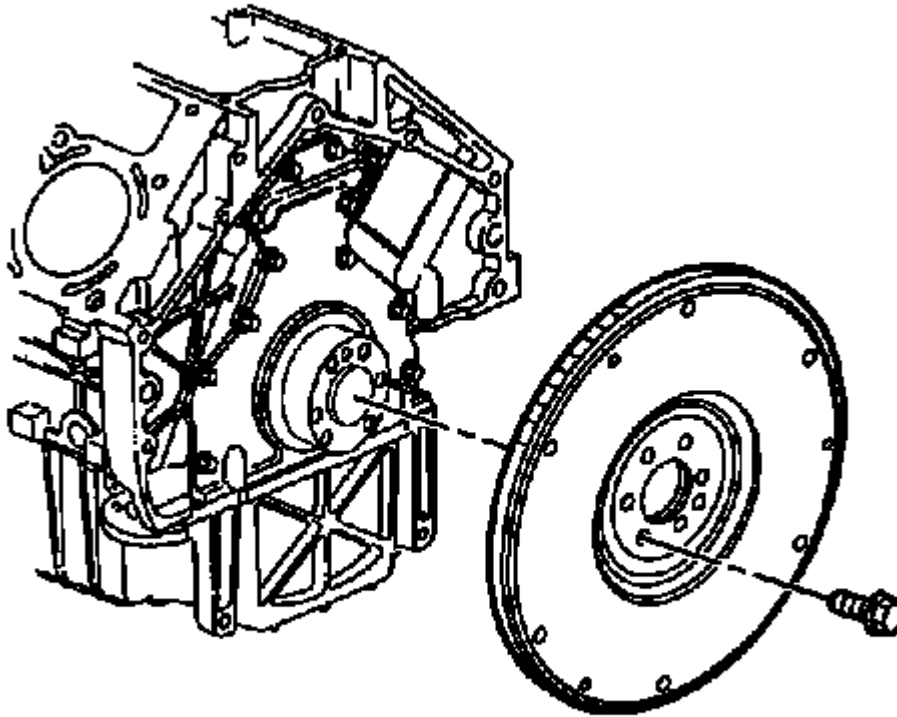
Engine Flywheel & Bolts (Manual Transmission)
